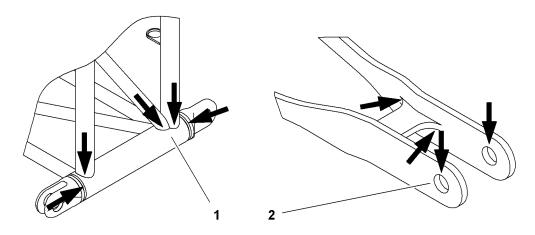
Excerpt from the drawings for checking the weld seams and holes
